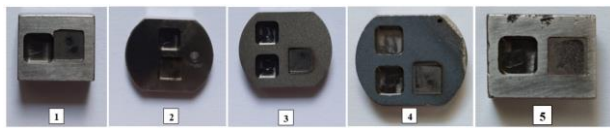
Parts of TiAl alloys processed by EDM and milling
